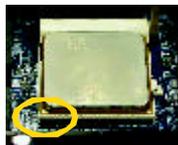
A1 pin location on the Socket and Processor. Move the socket lever to the locked position while holding pressure on the center of the processor.
